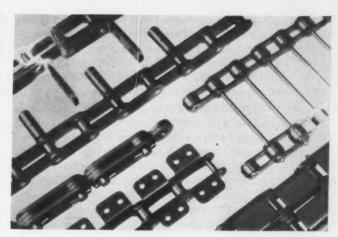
Standard parts can often be utilized for building up conveyor chain
